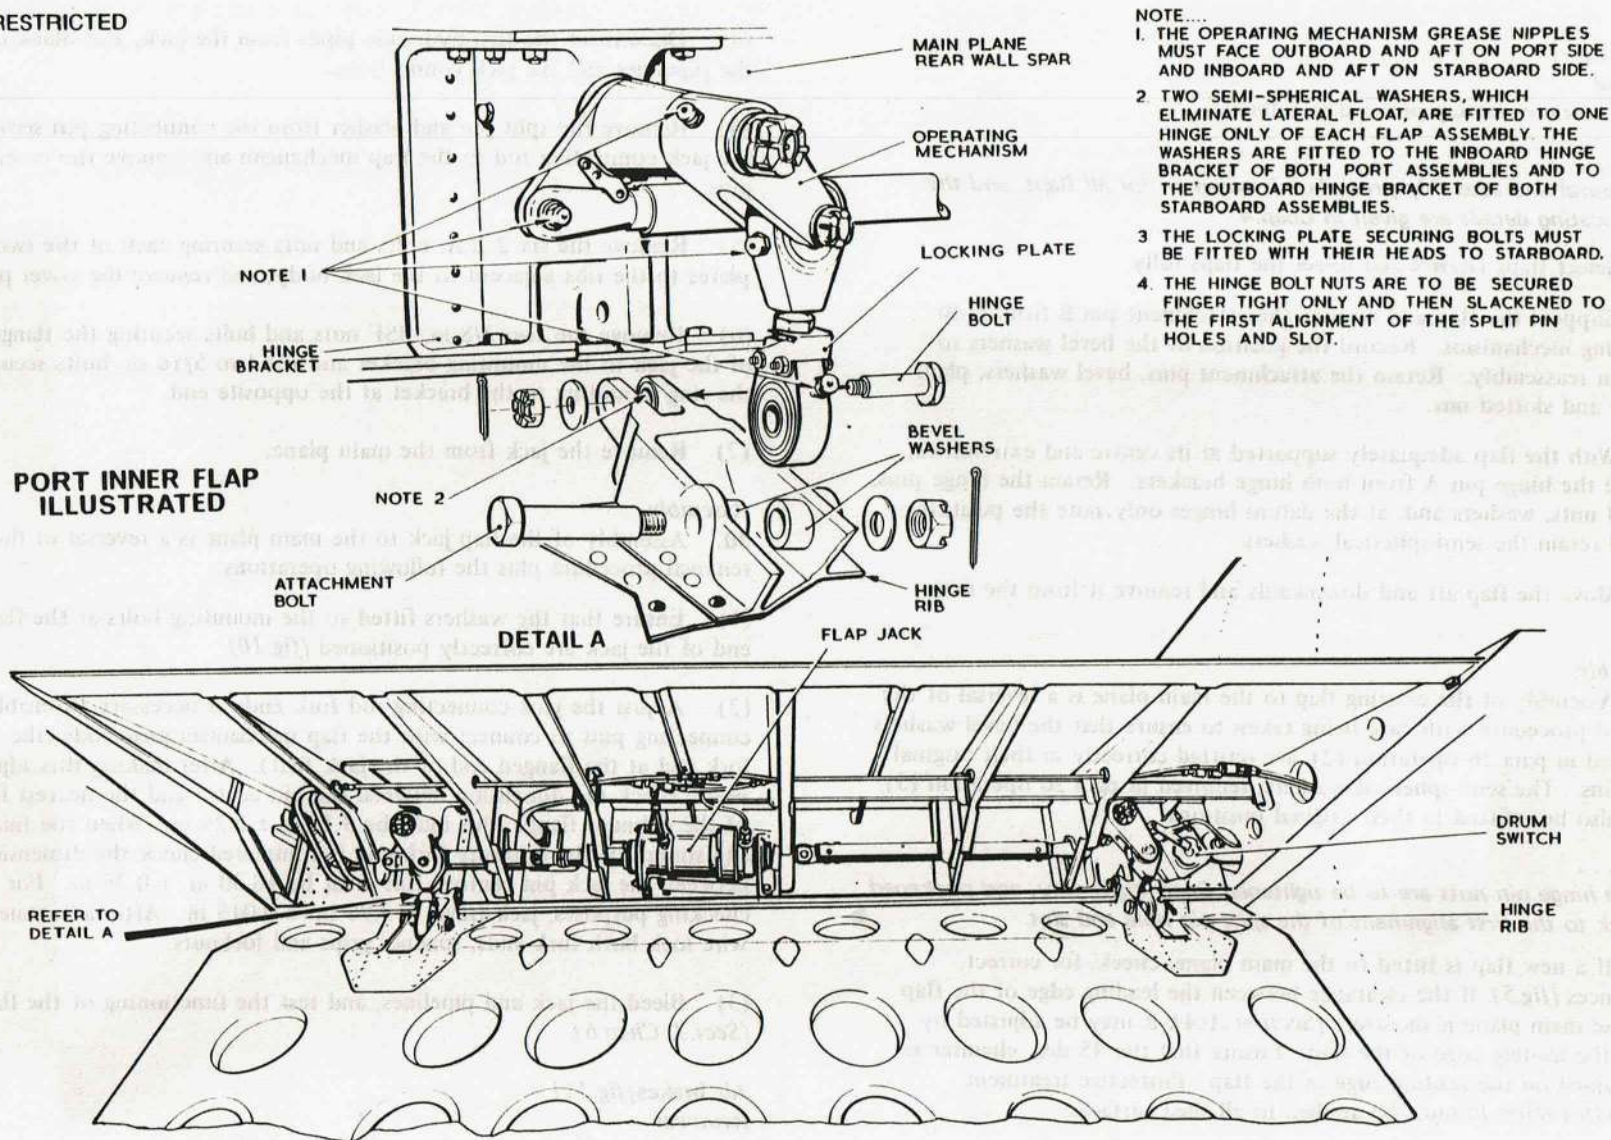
FLAP-REMOVAL AND ASSEMBLY
